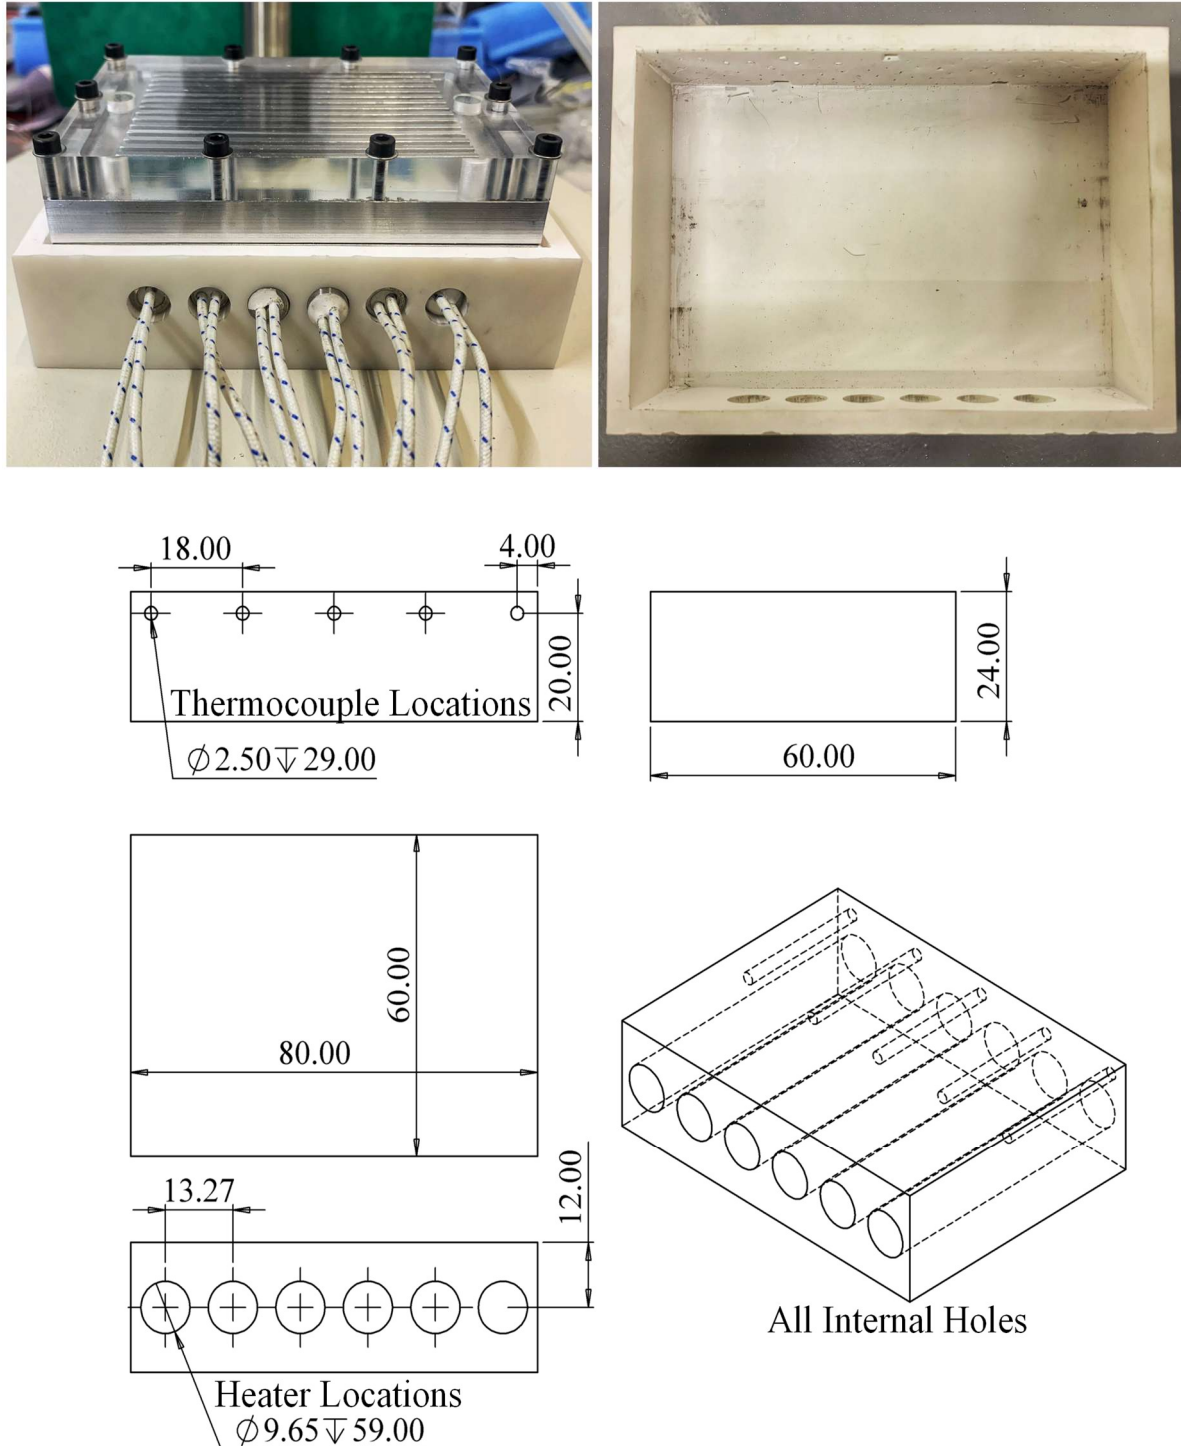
Housing modification and dimensions for a detachable heat sink setup
